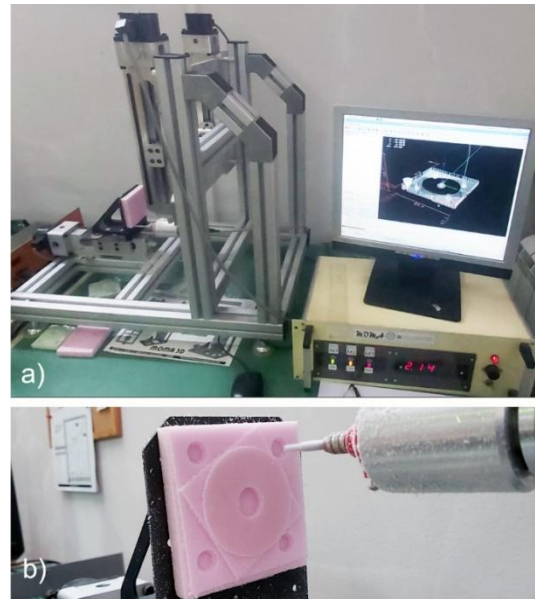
Machining test 2, CAD/CAM programming method – 2.5D test
